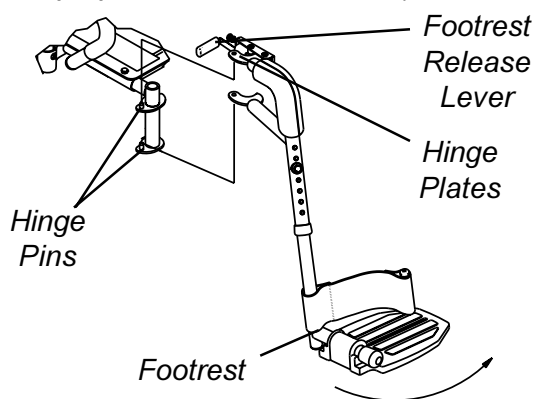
INSTALLING/REMOVING FOOTRESTS - 70°/ 70° TAPER PIN STYLE
